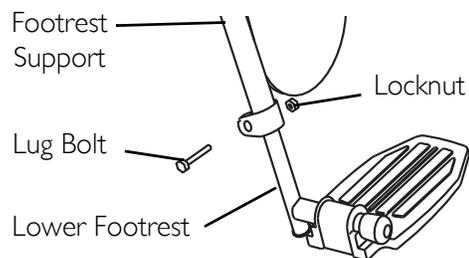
Installing/Removing Front Riggings - 70° Taper
